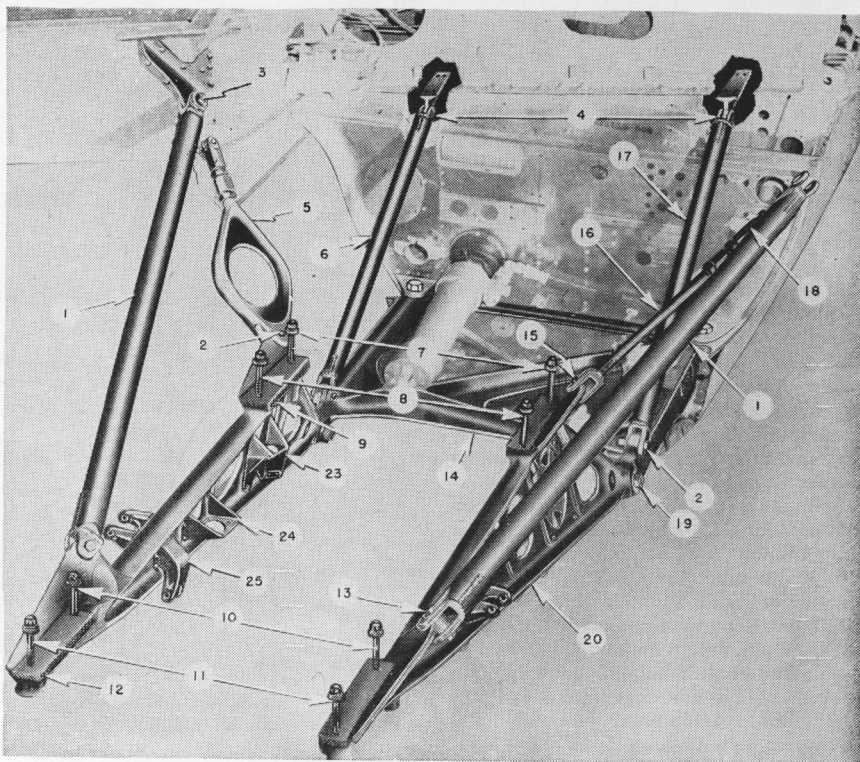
Engine-mount and support assembly: (1) diagonal tubular members; (2) yoke attaching bolt; (3) upper diagonal bolt; (4) aft upper attaching points; (5) diagonal assembly; (6) aft diagonal; (7) and (8) attaching bolts; (9) pads; (10) and (11) forward attaching bolts; (12) pads; (13) fore diagonal attaching point; (14) bay assembly; (15) yoke attaching bolt; (16) and (17) diagonals; (18) diagonal attaching point; (19) lower truss bolt; (20) truss.
